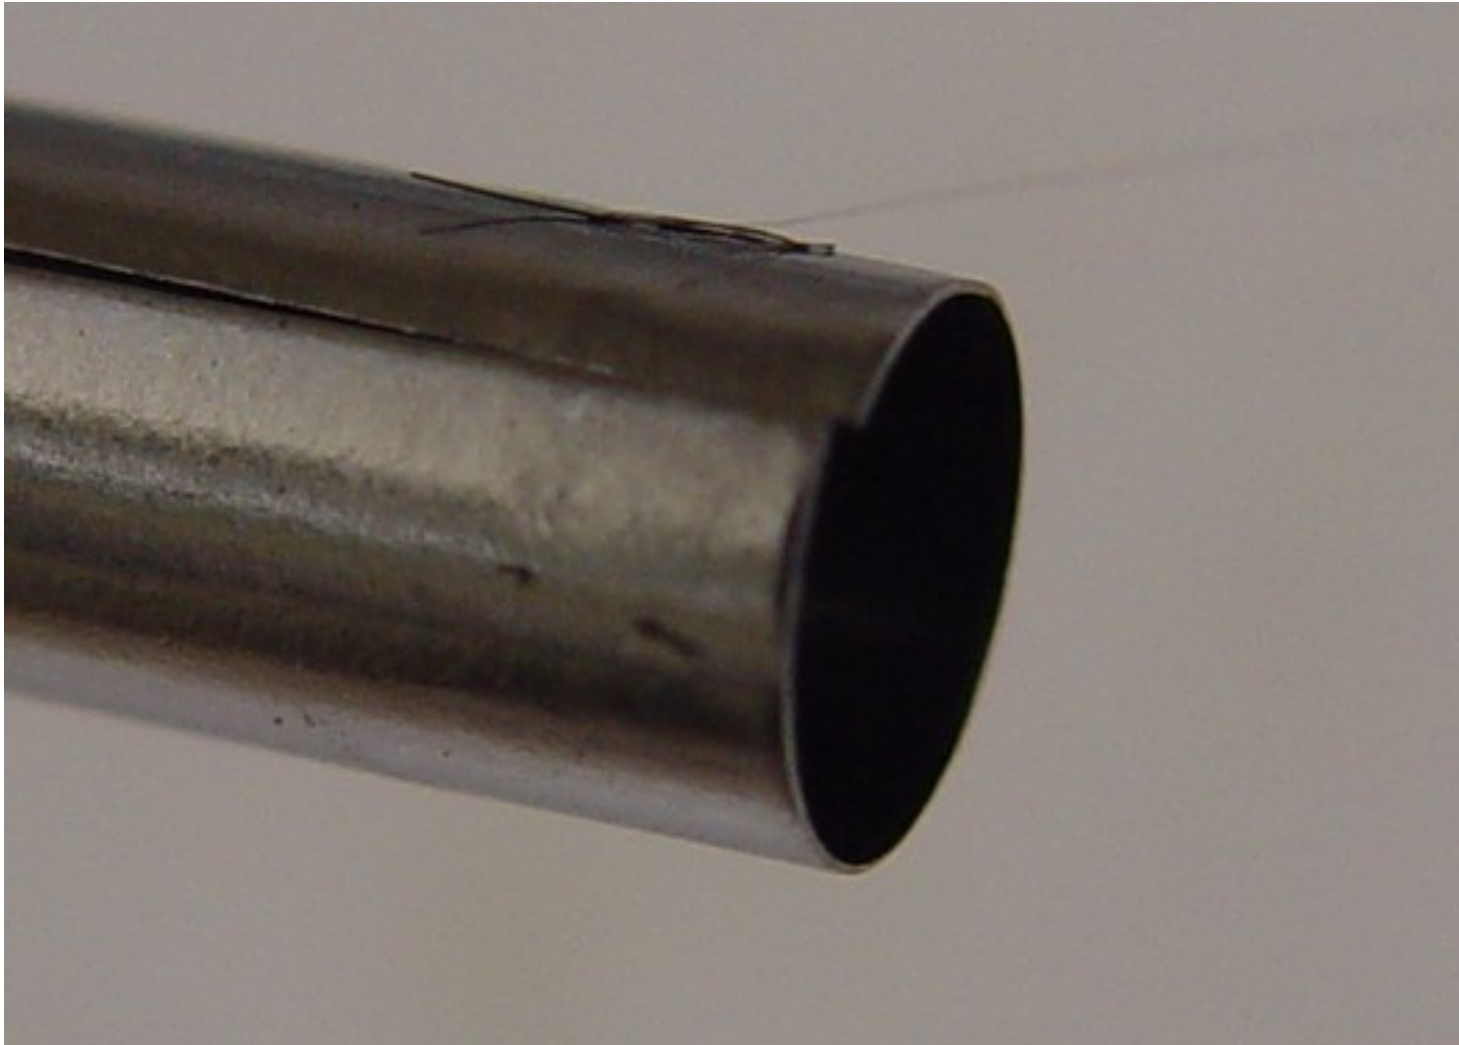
Cathode, burr and W-wire lead. The photo shows a 50 μm diameter W wire (burr) spot welded to the rolled Fe-foil cathode parallel to the seam. Also evident is the 13 μm diameter W-wire lead to be connected to the high voltage electrode; described later in the text.
